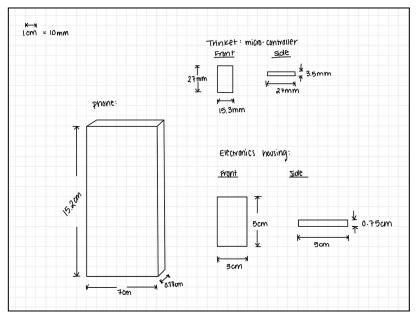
Initial drawing and dimensions of a smartphone, components, and housing.
